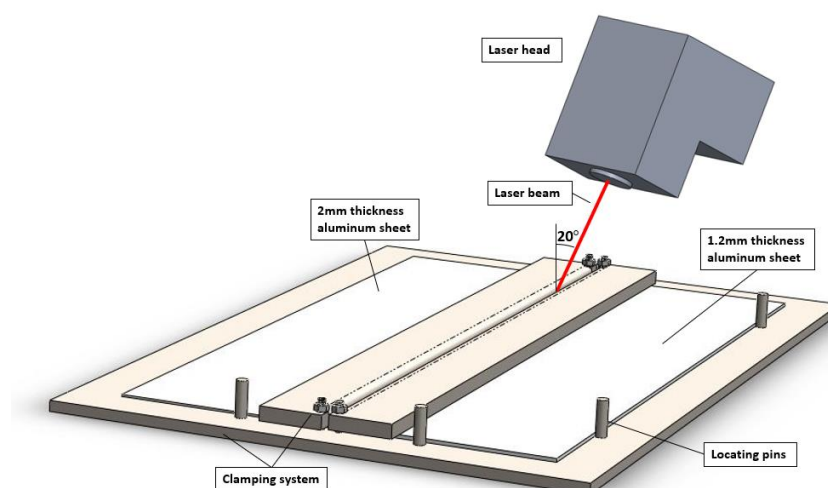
Mechanical fixture for welding the aluminum sheet coupons and laser welding.
